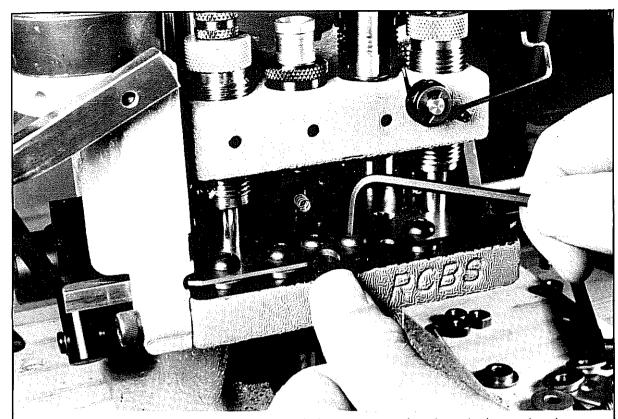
Use the Hex Key Wrench provided to remove and replace the button head cap screws that secure the front Transfer Rail. Note cases are part way into the Size and Crimp dies. This provides proper positioning of the front rail as the cap screws are tightened.
